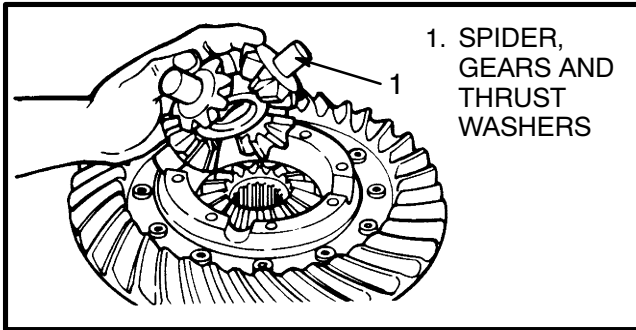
INSTALL THE SPIDER, GEARS AND THRUST WASHERS
